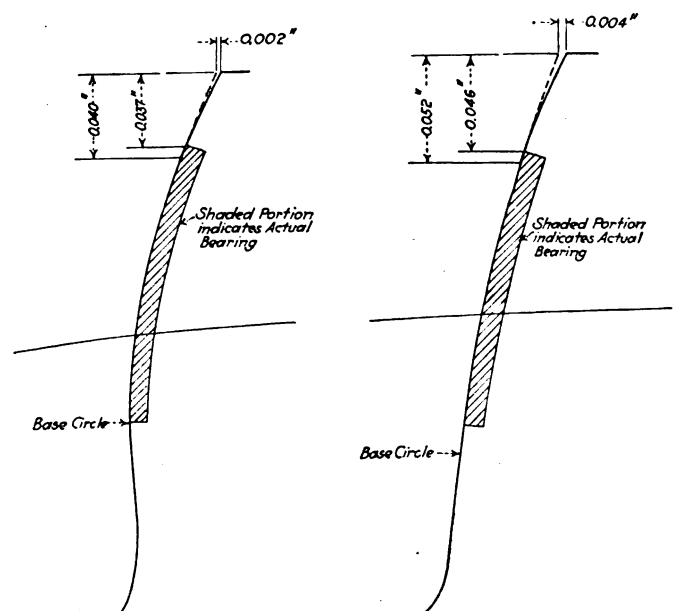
TOOTH-FORMS OF A PAIR OF GEARS THAT ARE INTENDED TO BE IN CONTACT WITH EACH OTHER AS OBTAINED FROM THE HOB OUTLINE SHOWN IN FIG. 11
